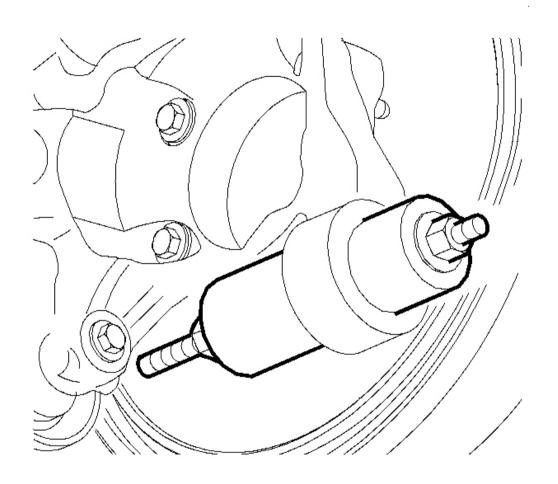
Lower Control Arm Bushing & Knuckle Assembly Courtesy of GENERAL MOTORS CORP.
